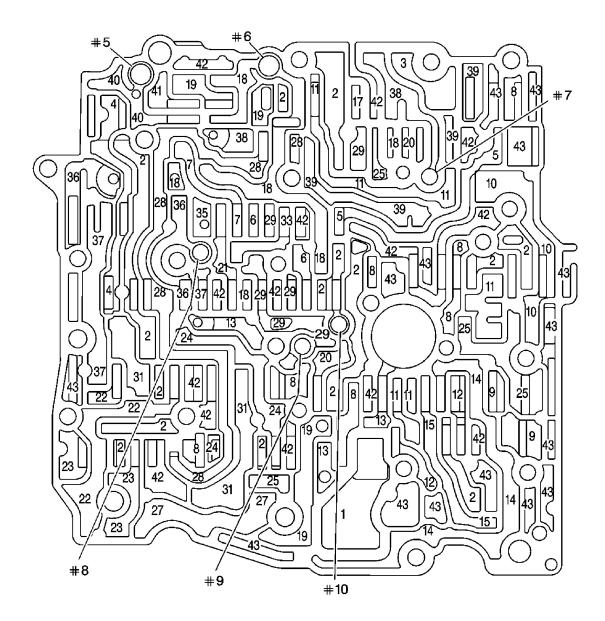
Control Valve Body Fluid Passages - Case Cover Side - With Touch Activated Power
